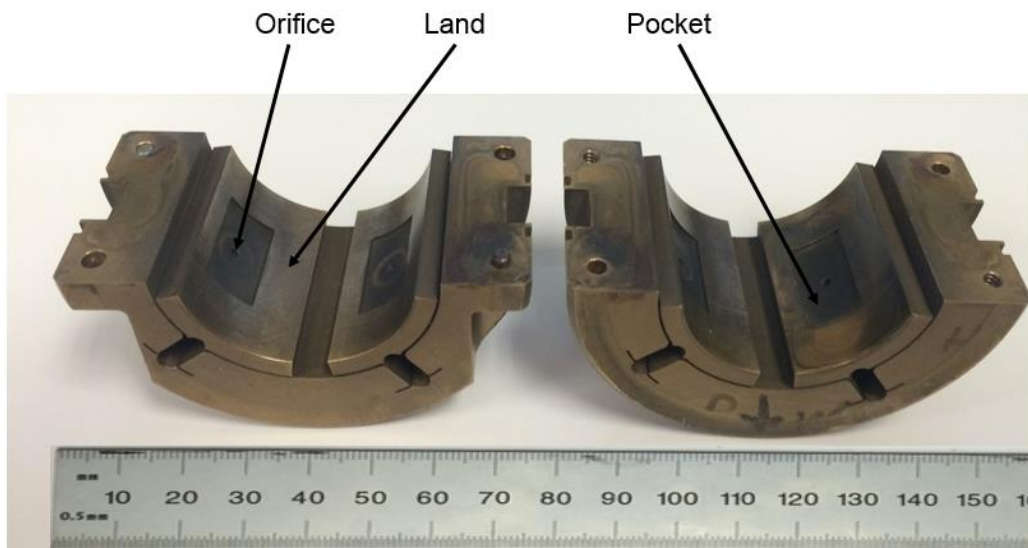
Photograph of original flexure pivot, tilting pad journal bearings with water lubrication.
